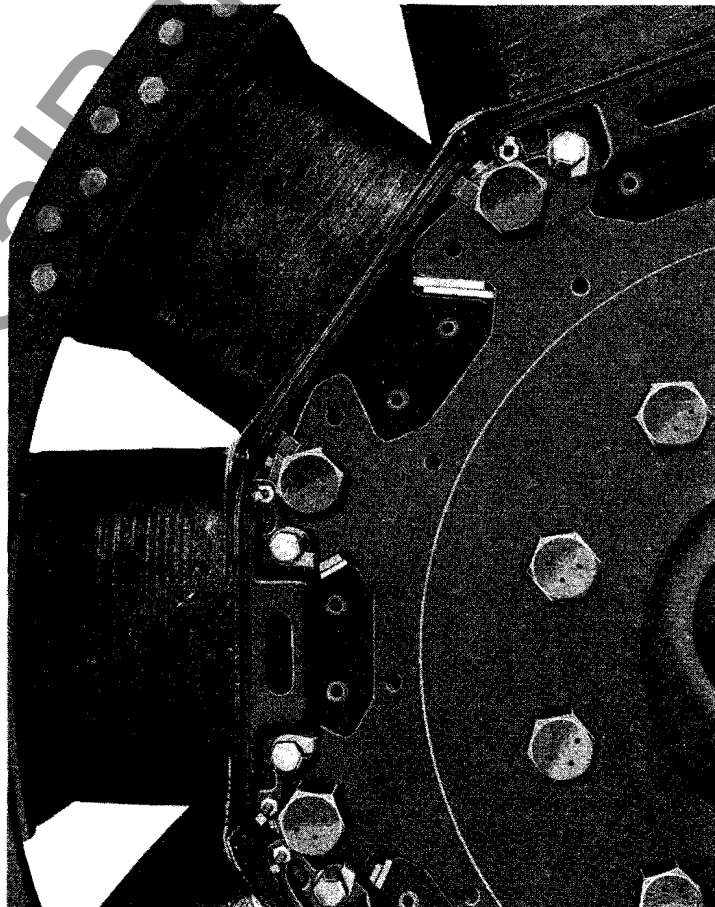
PLATE ROTOR, DETAILS OF LOWER COIL SUPPORTS AND COIL WEDGES
